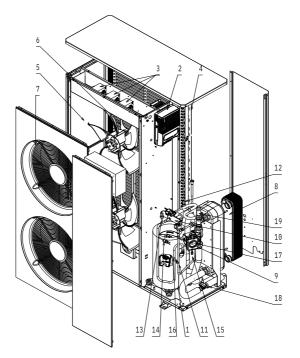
Design of the ZHHS-01-15K-R290-V5 heat pump outdoor unit
